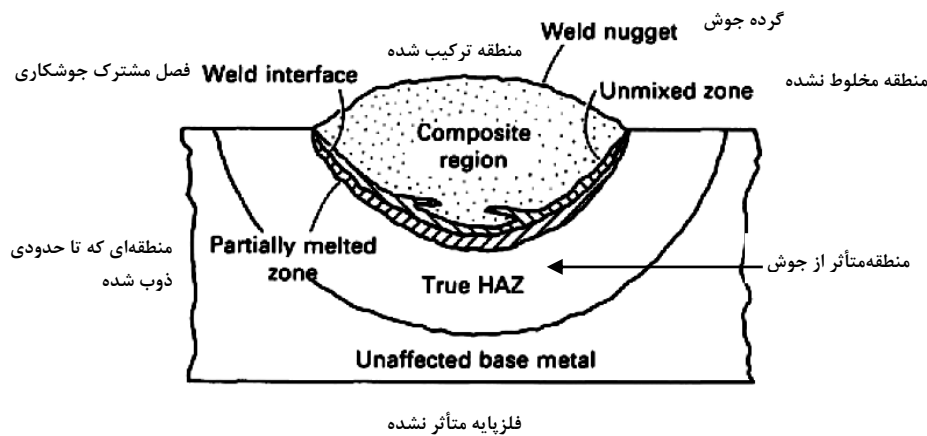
SCHEMATIC OF A WELD CROSS SECTION
